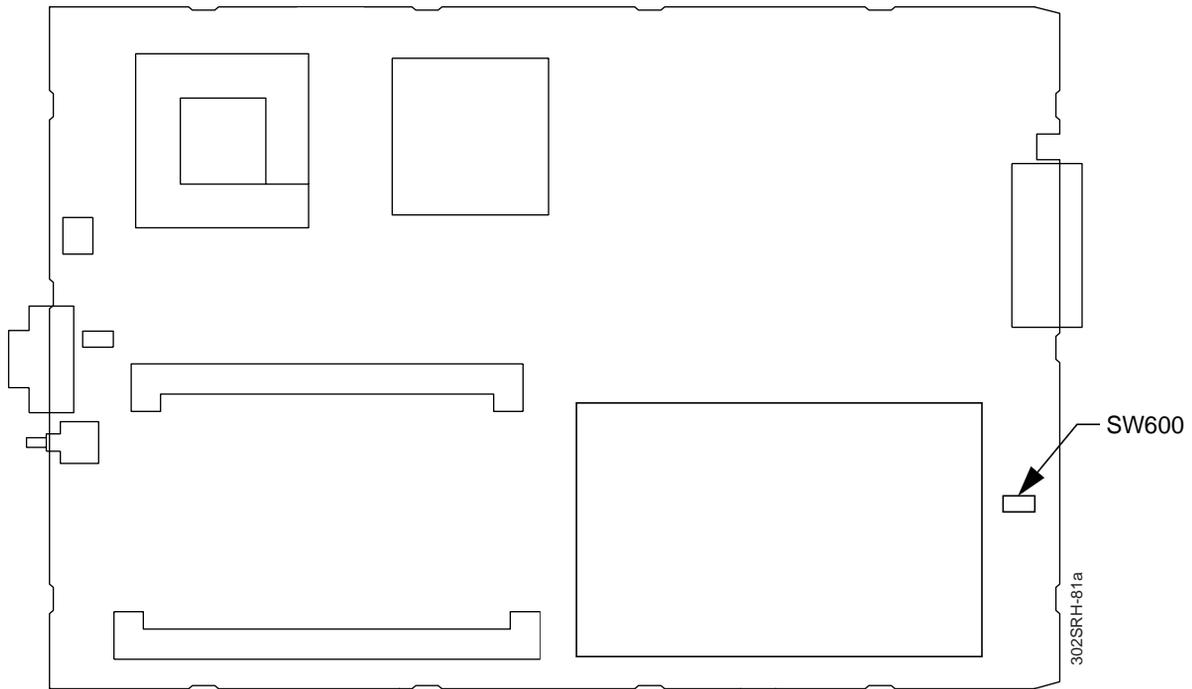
BCM Component Layout—DIP Switch S2 (SW600) Location
